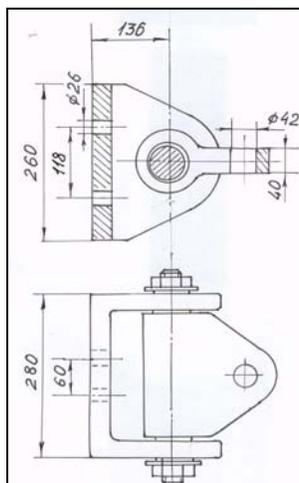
An attachment assembly of RGN type developed by VNIIE for reconstruction of tension insulator sets attachment to cross arms of the 1150 kV OHL
